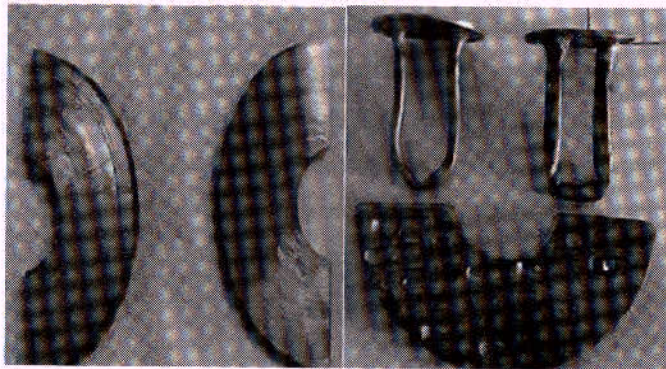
AISI P-20 work piece before and after machining with Cu U-shaped tool
